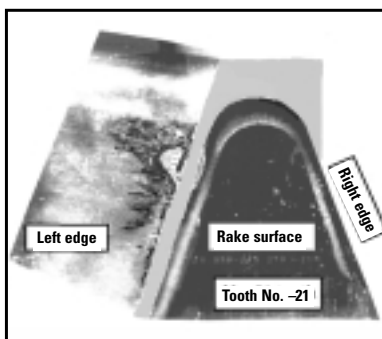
Typical example of chipping failure of cutting edge of carbide hob under dry cutting (example 1).
